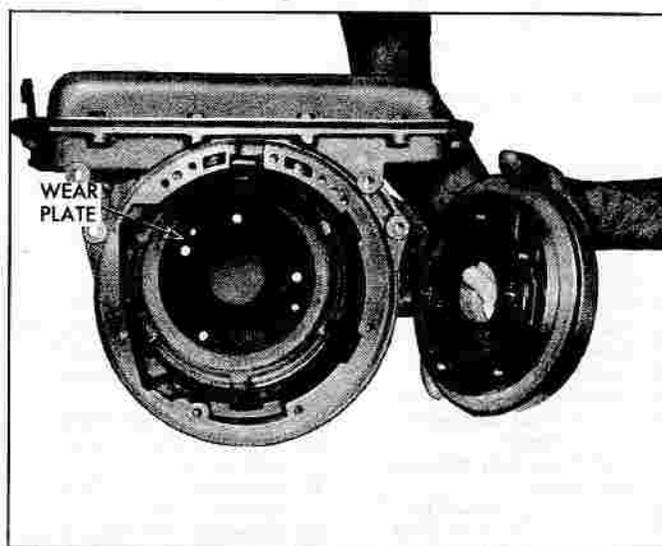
E-28—Removing Rear Pump and Reverse Piston Assembly
